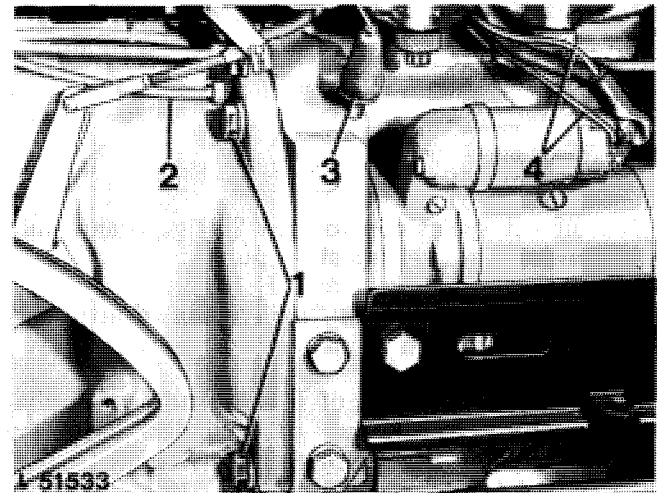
Separating between Engine and Clutch Housing, R.H. Side
